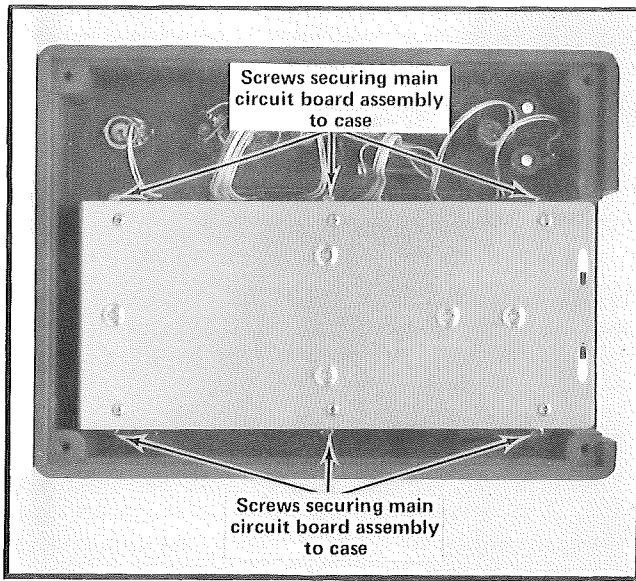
Screws holding chassis-circuit board assembly to case.
